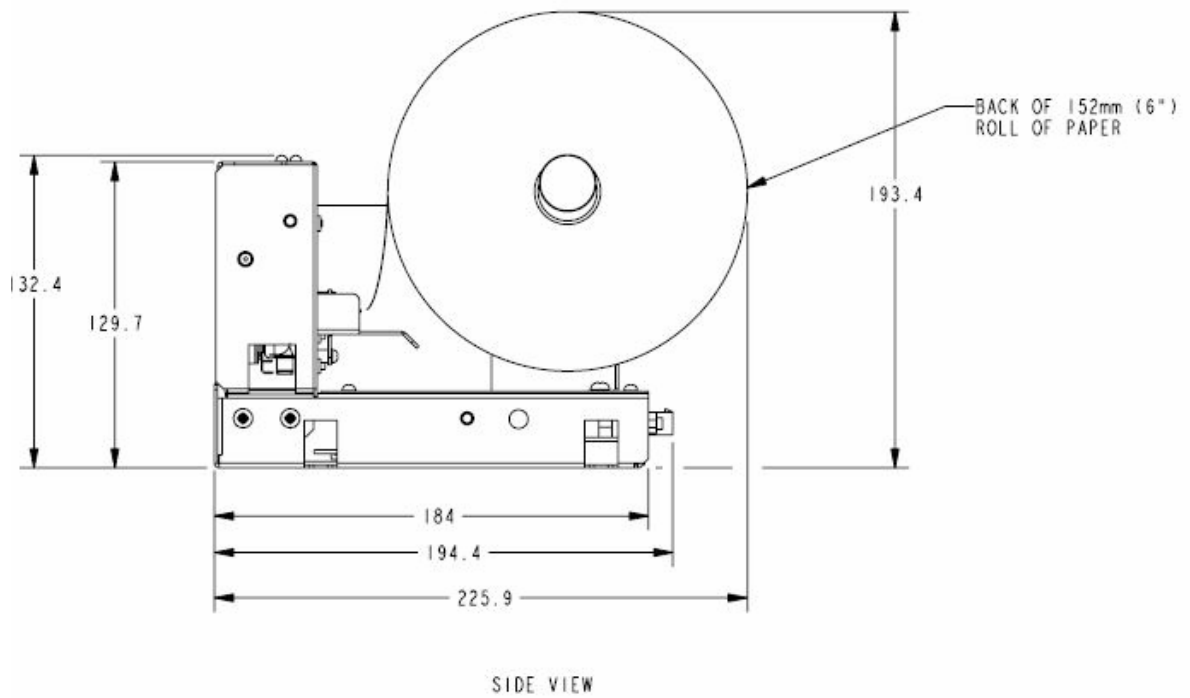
Mechanical Dimensions - High Speed Kiosk Compact Side View
